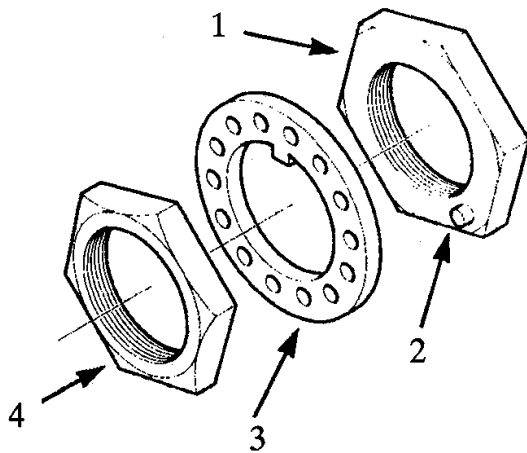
Adjusting Nut Identification and Installation - Dowel-Type Spindle Nut Washer
